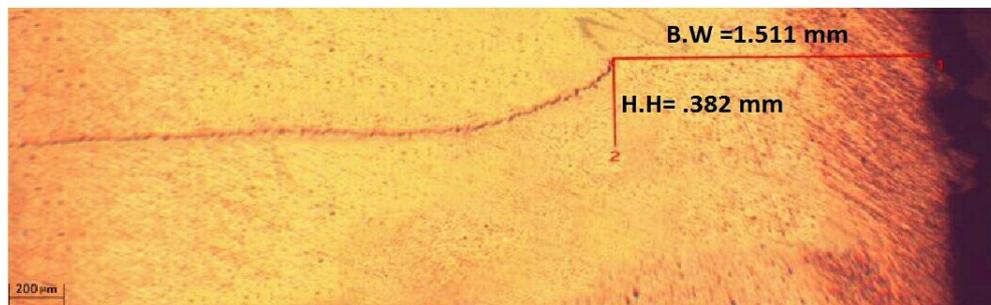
microstructures of a friction stir spot weld made using triangular pin 1200-rpm tool rotational speed.
